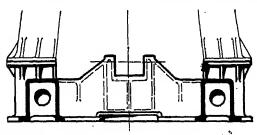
Cross-section of Bed Plate of Junkers Mercantile Marine Engine.
